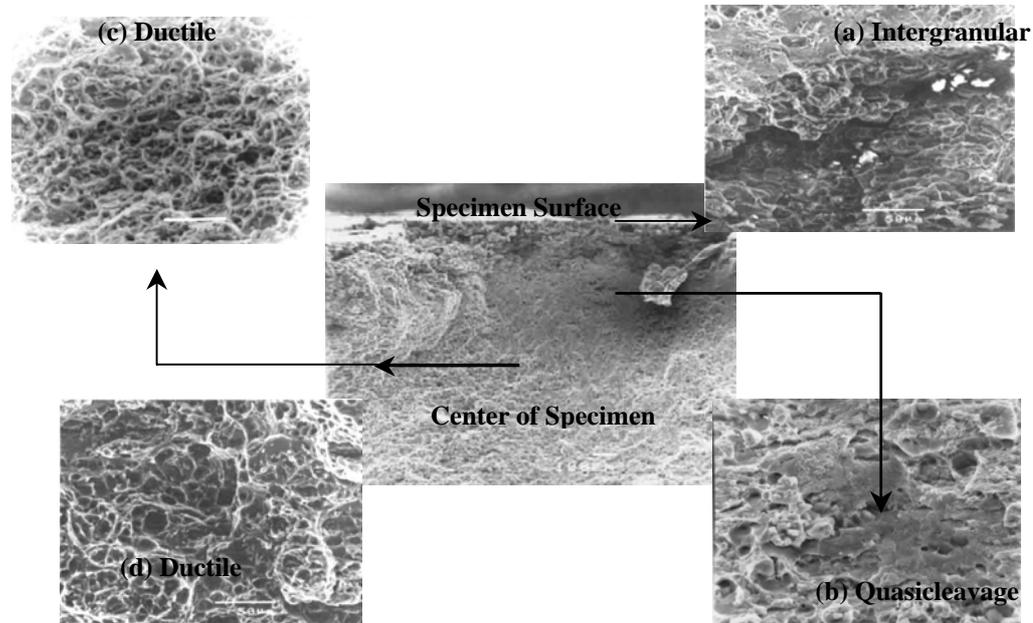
Fracture surfaces of condition C (corroded 24h) specimen. Individual photos correspond to different modes of fracture from the specimen surface through the centre of the specimen.
